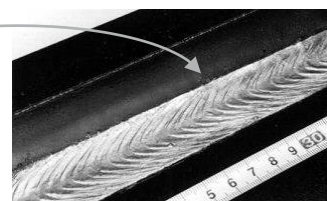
Example of cap layer treatment by single pass welding
